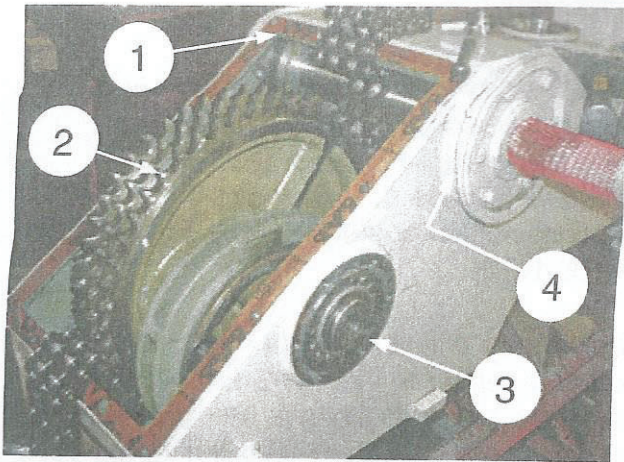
Preparation for removing the eccentric sprocket. The cover [not shown] is held in place by bolts at point [1]. The chain is disconnected at a cotter pin type connector link. To remove the eccentric sprocket [2], remove the bolts and retainer plates [3]. Remove the jackshaft bearing housing [4] to remove the jackshaft.
